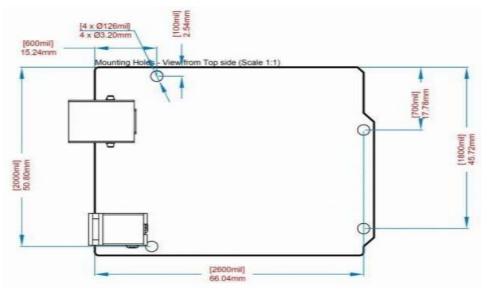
Board Outline & Mounting Holes of Arduino UNO
